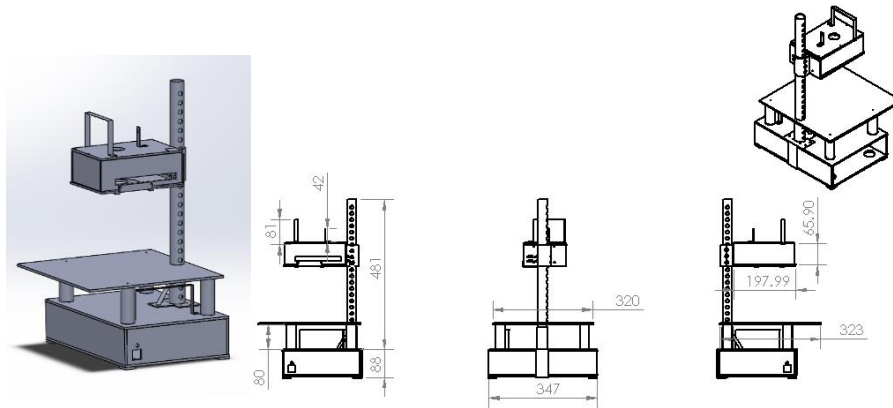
CAD rendering (left) and technical drawing (right) of the intermediate tabletop portable imager redesign.
